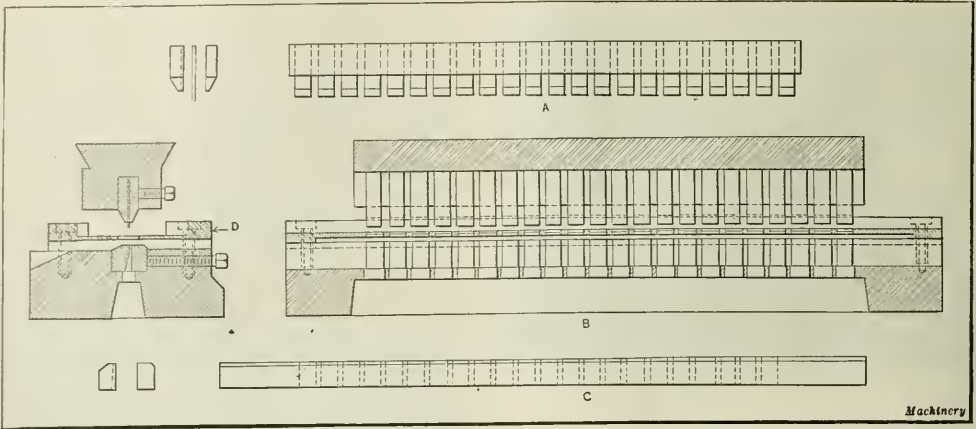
(A) Punching Blades and their Strips; (B) Arrangement of Punch and Die Parts on Machine; (C) Die Strips
